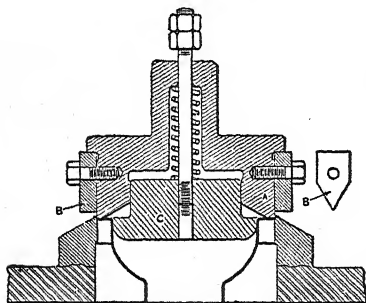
Die for Trimming Flange to Required Diameter and Cutting the Trim, as Shown at F.
